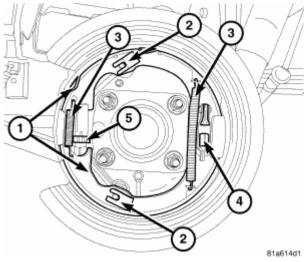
Identifying Brake Shoes Courtesy of CHRYSLER LLC
